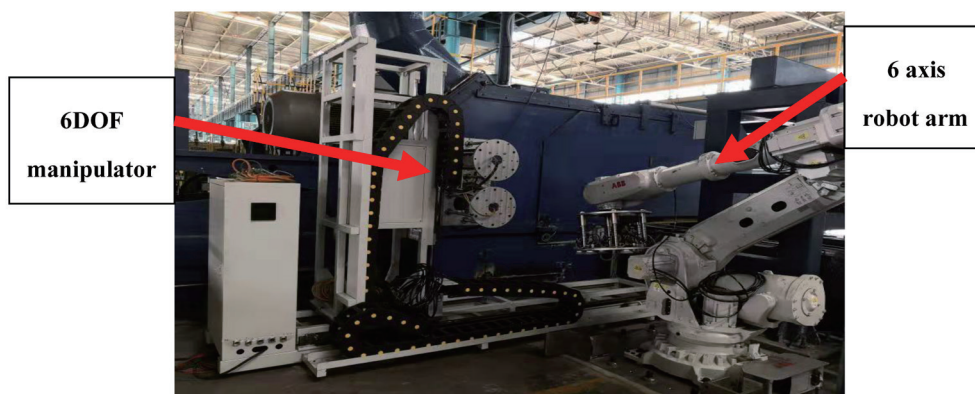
(Color online) Machine-vision-based grinding-wheel-saw automatic replacement system.
